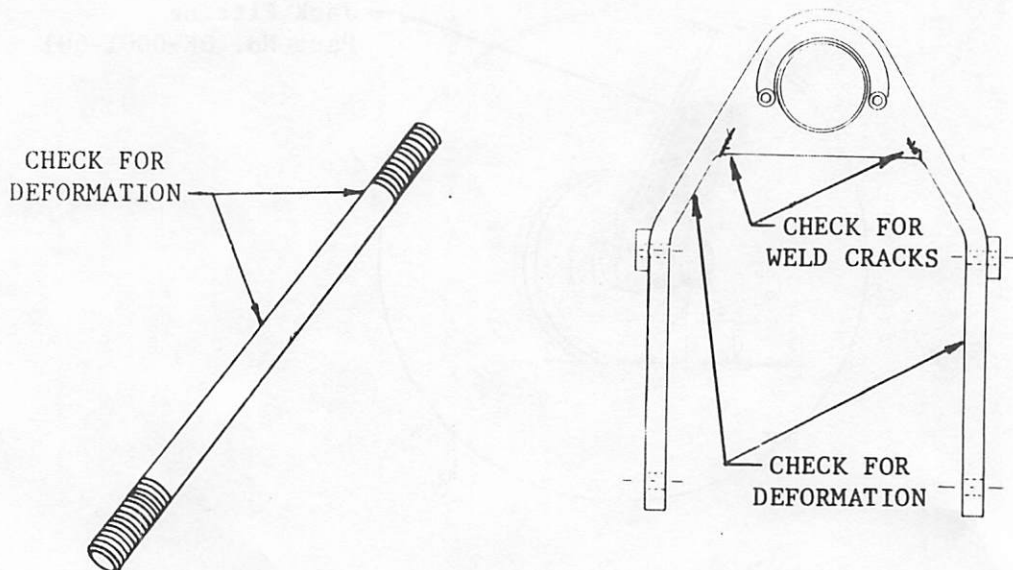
Nose Gear Axle Rod and Fork Assembly
